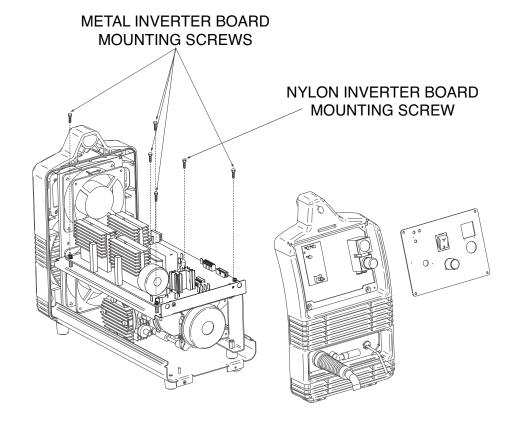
INVERTER BOARD MOUNTING SCREWS
